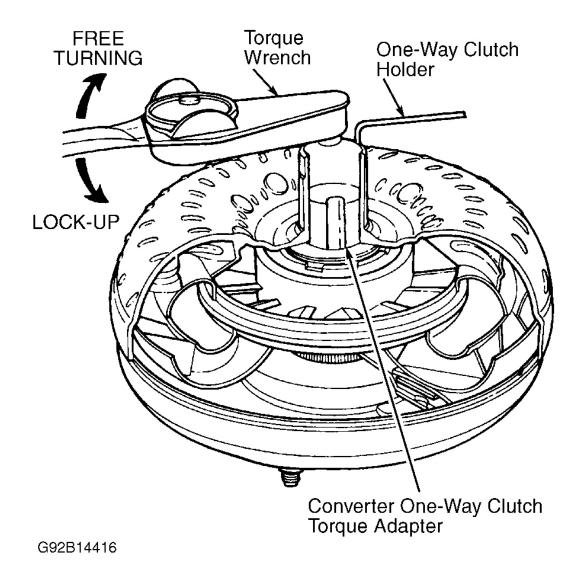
Checking Converter One-Way Clutch Courtesy of FORD MOTOR CO.
